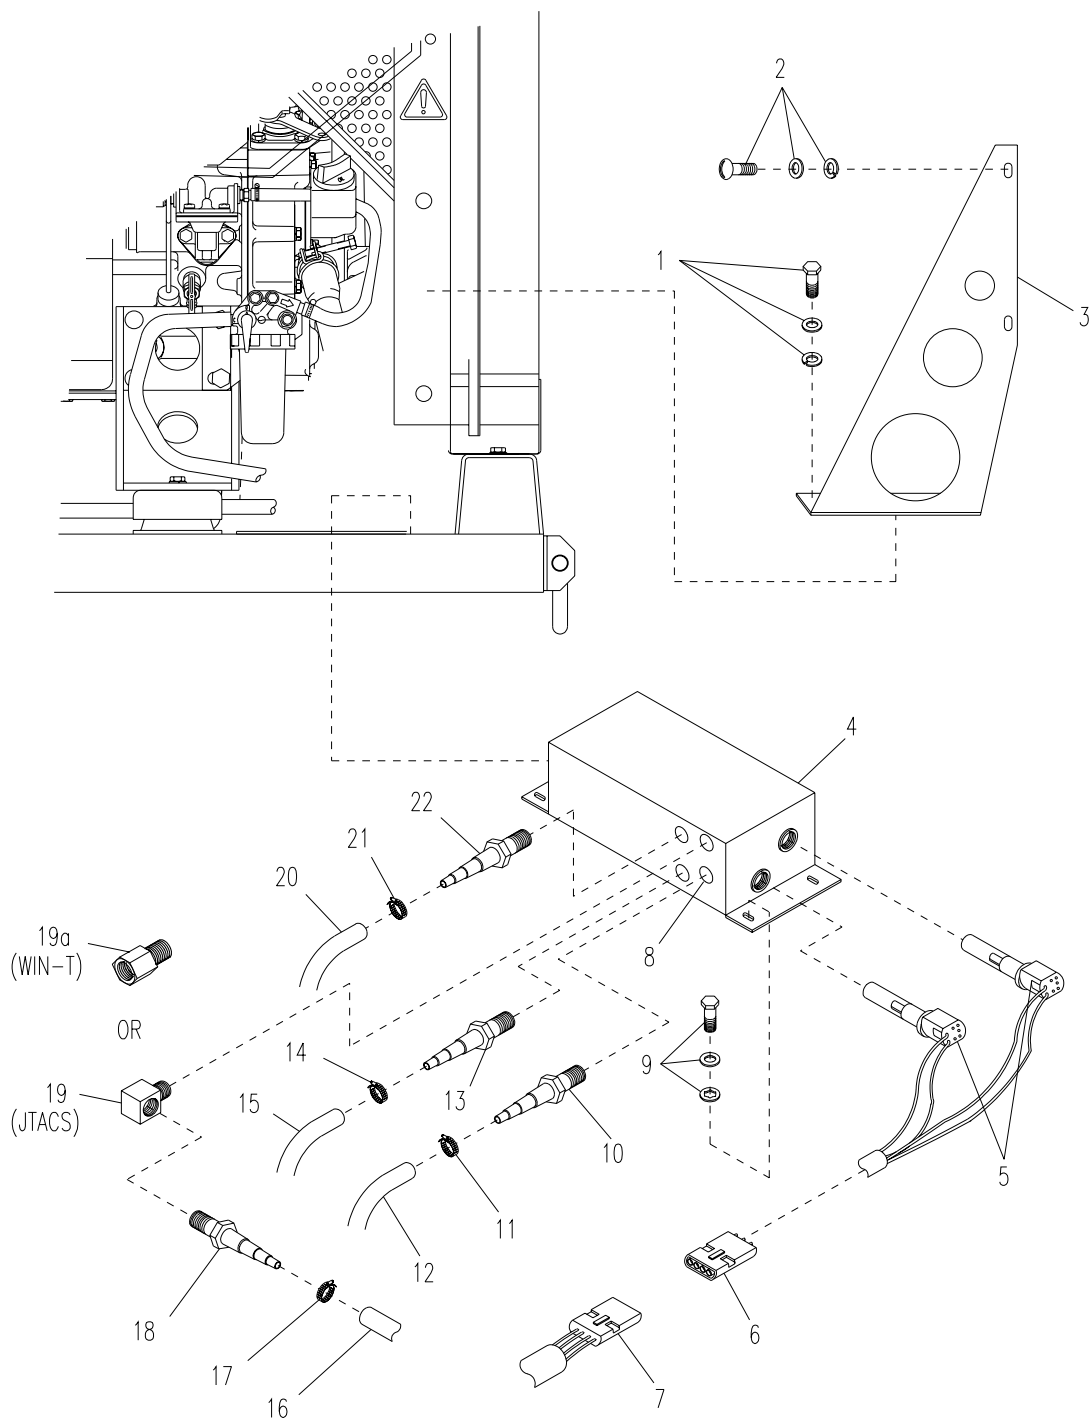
Fuel Day Tank Assembly (JTACS and WIN-T)
